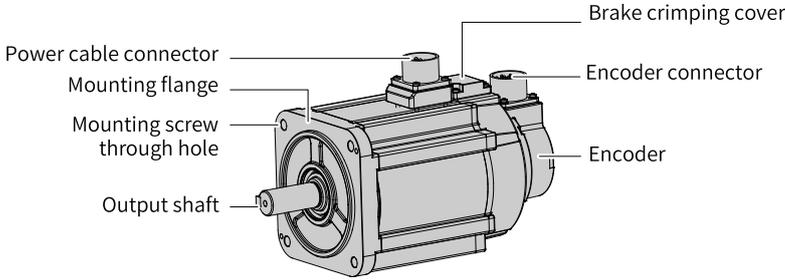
Components of servo drives in frame sizes 100/130/180
